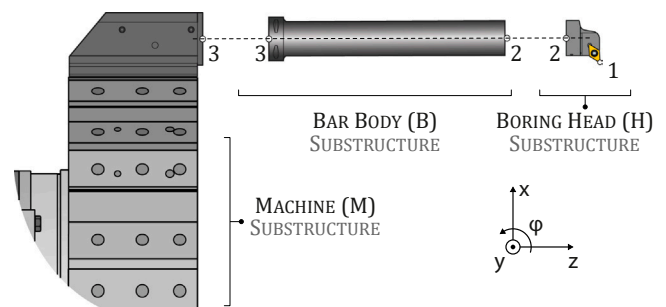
Boring bar assembly is shown containing the machine (M) substructure, the bar body (B) substructure and the boring head (H). The parts connect at points 2 and 3, while the cutting edge is located at point 1.
